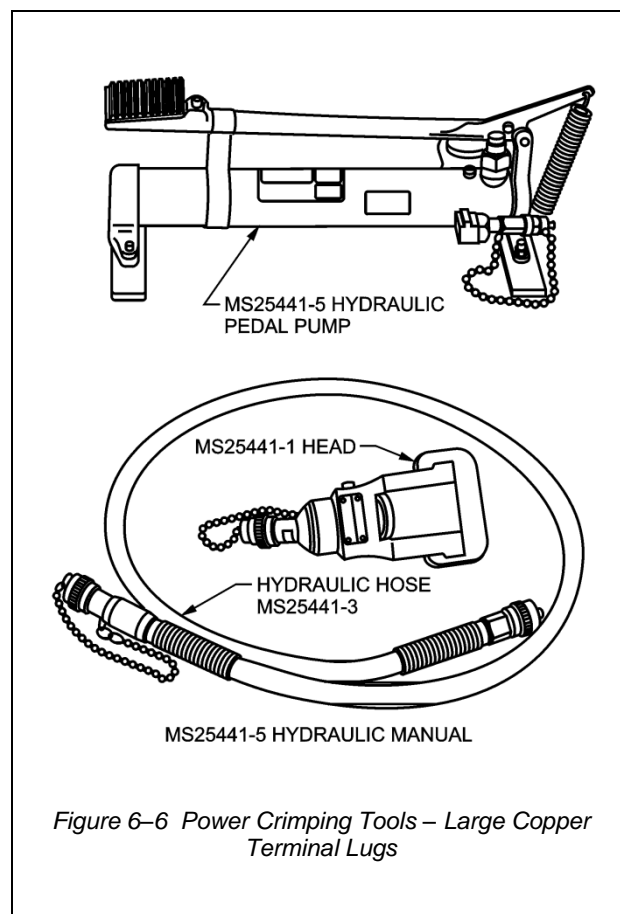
Power Crimping Tools – Large Copper Terminal Lugs
